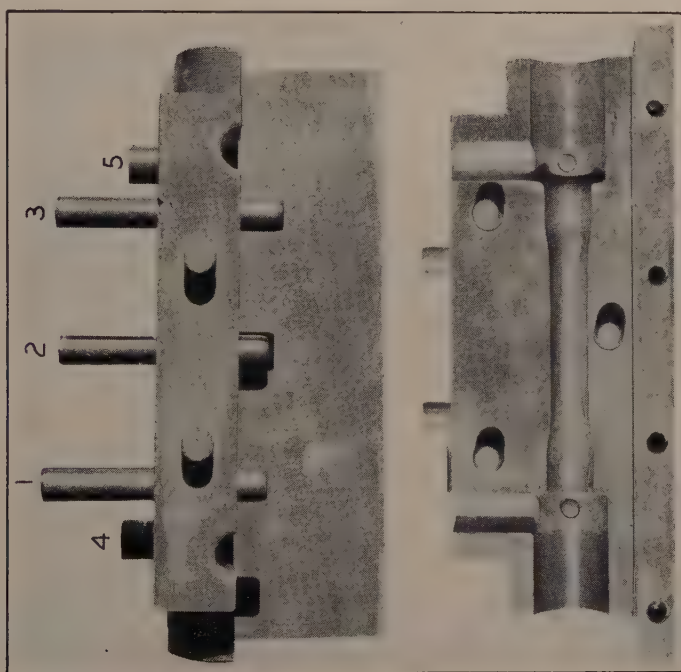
STEEL MOLD FOR MAKING CHILL-CAST TENSILE BARS.
